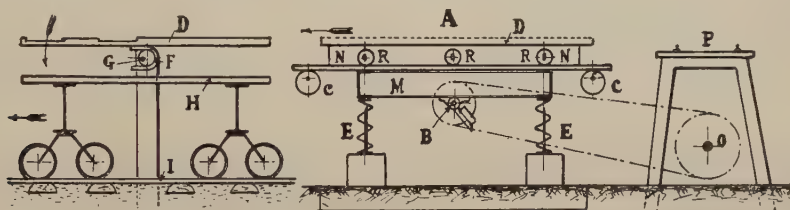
Diagram of a vibrating table carried on springs, with an arrangement for removing plane and heavy parts from the moulds.
